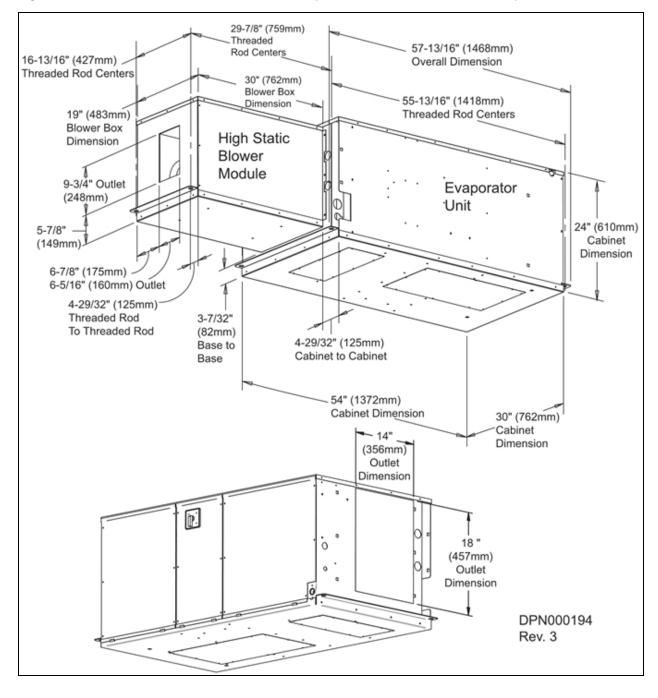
Dimensions, chilled water units with optional belt drive blower assembly
